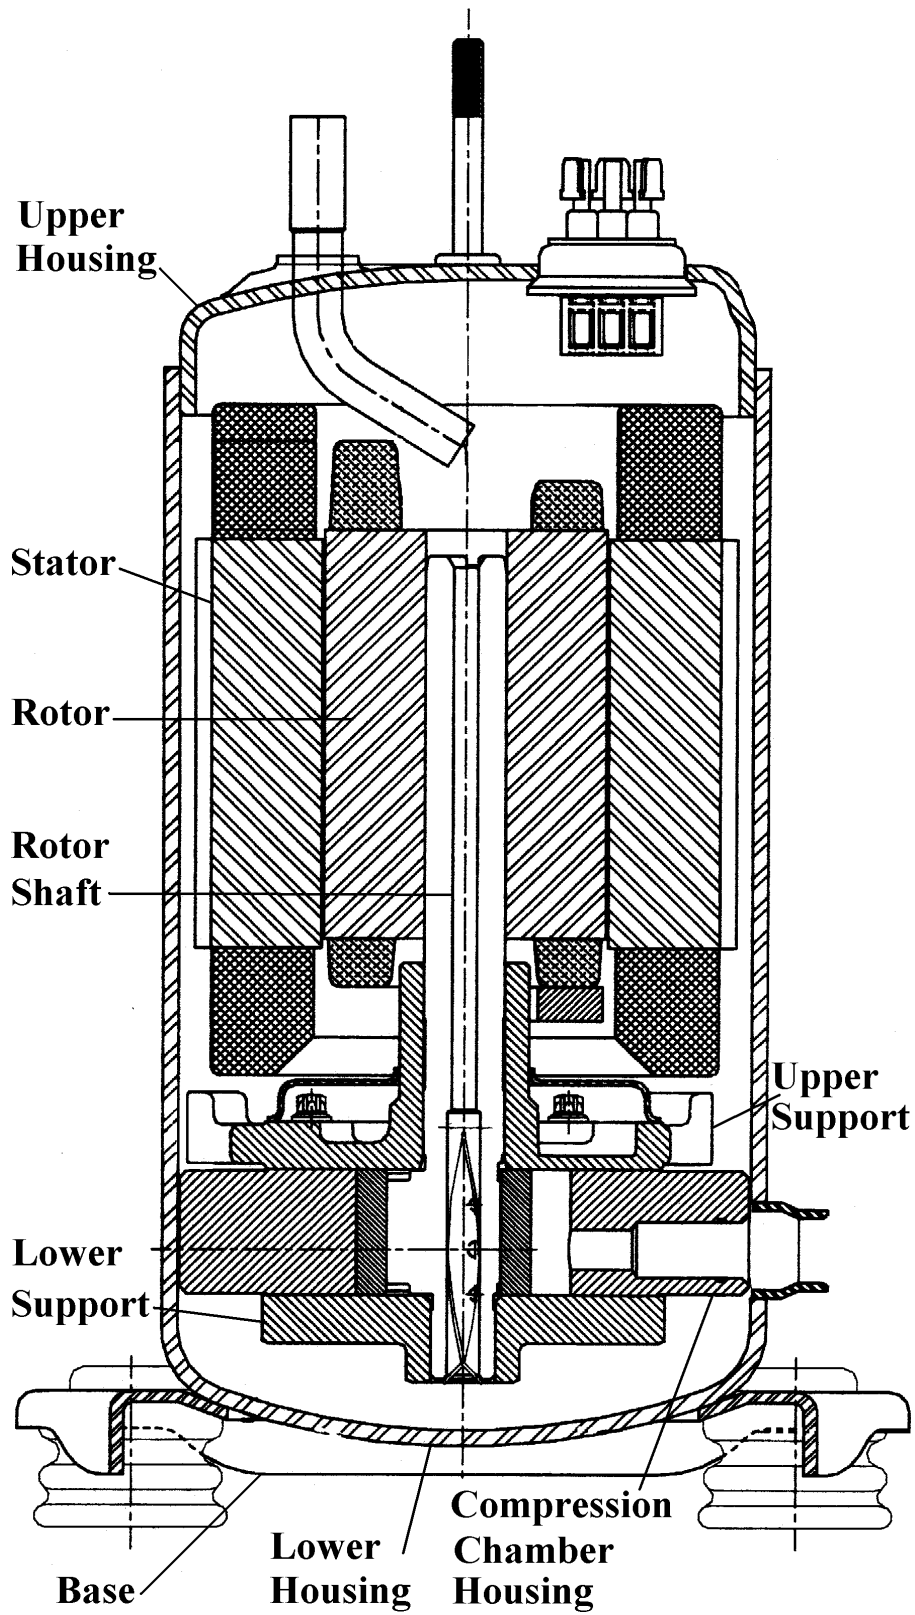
Cross-sectional view of compressor as supplied by the manufacturer
